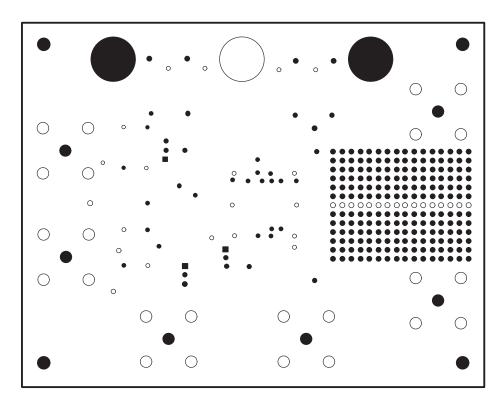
THS6002 EVM PC Board: Layer 1 — Top Side Layout
